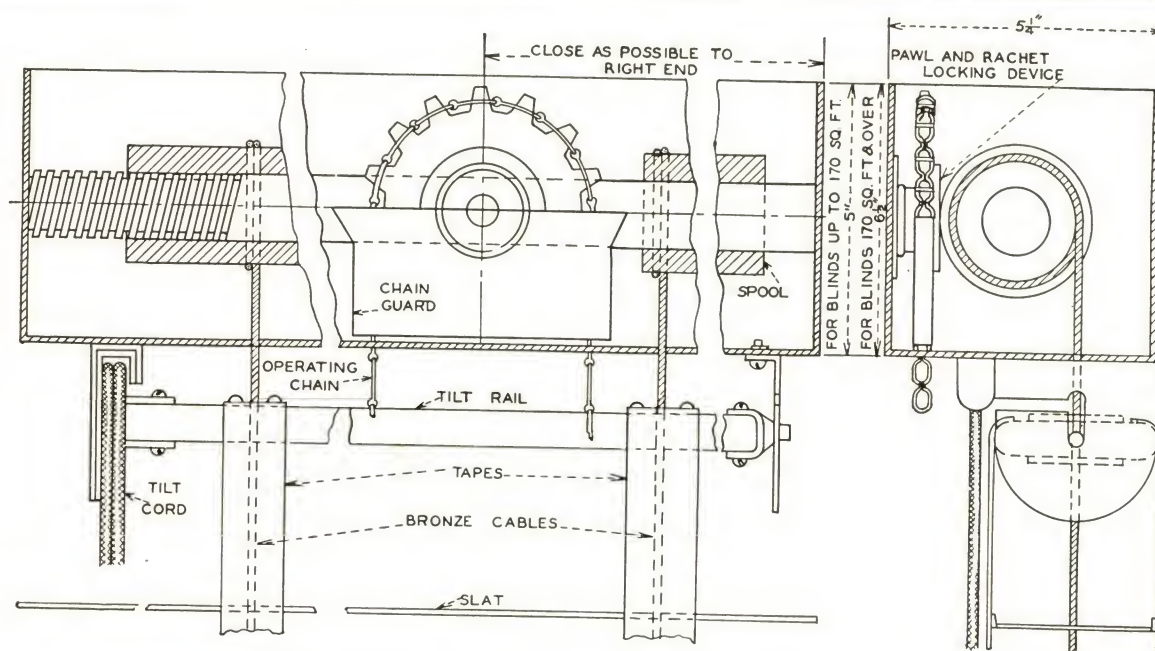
#### DETAILS OF ROLLER BOX AND TILT RAIL SHOWING OPERATION
